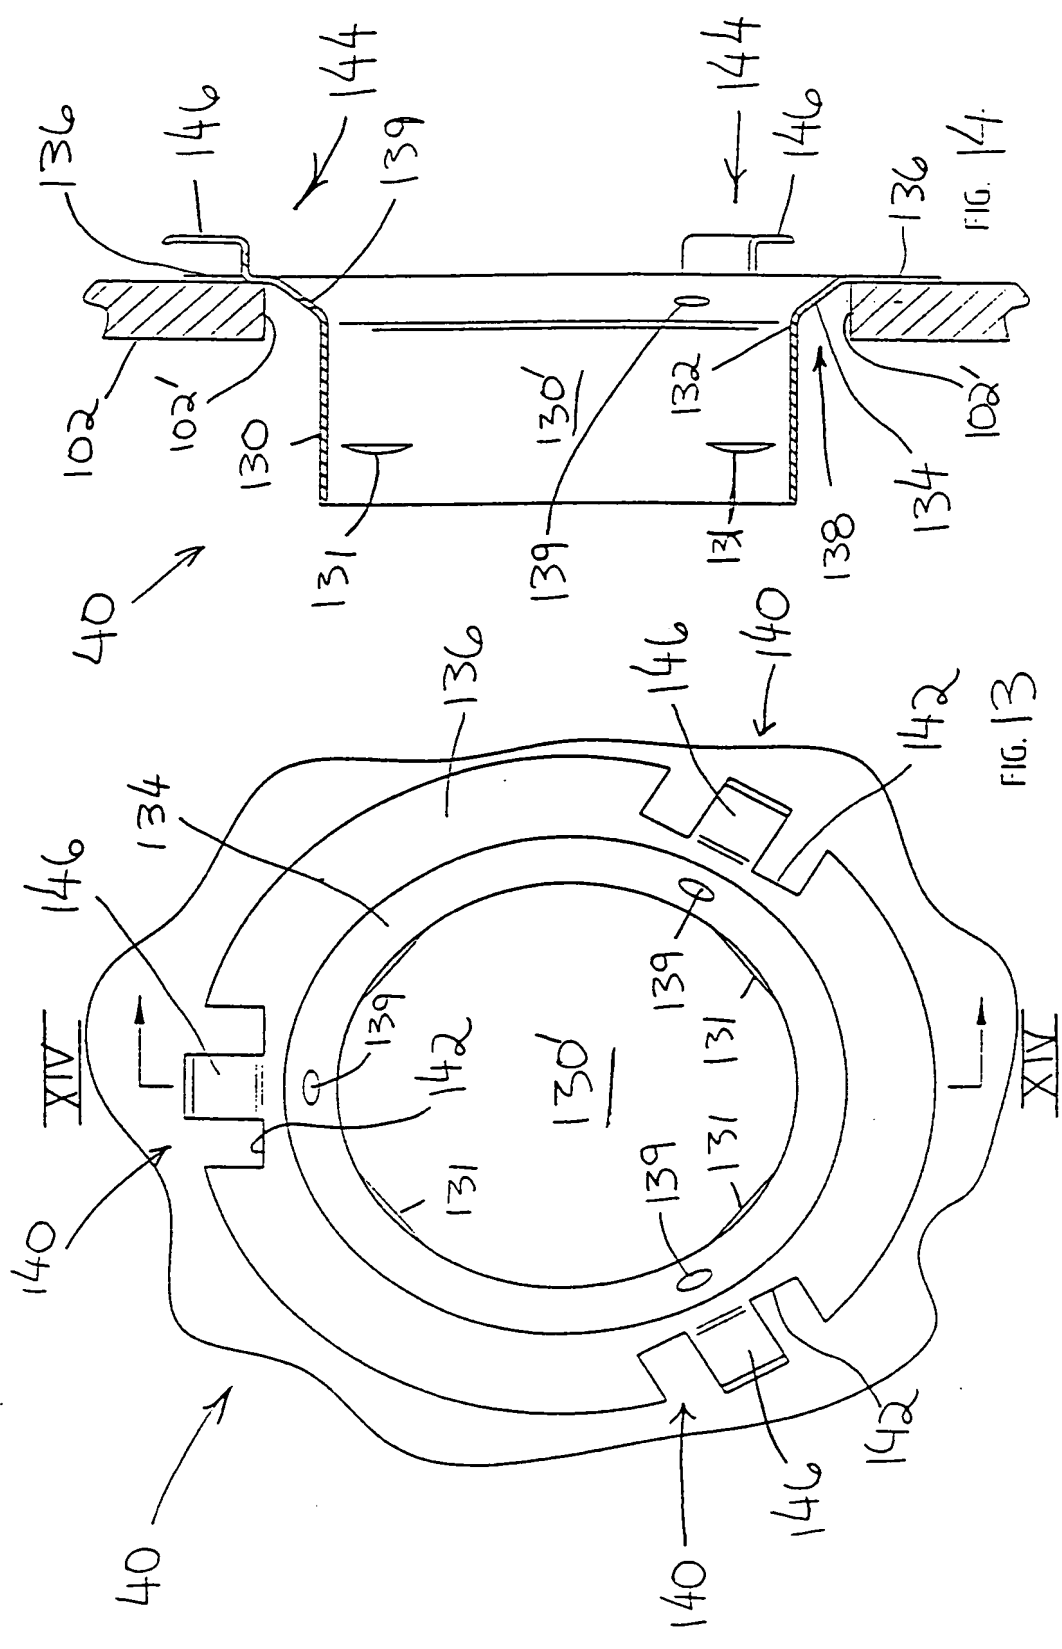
is a cross-sectional view of a mechanical assembly. It shows a central shaft (130) with a central bore (131). The shaft is surrounded by a housing (136) which has a central bore (132) and a flange (134). The housing is secured by a nut (140) and a washer (142). The assembly is shown in a cross-section with a dashed line indicating the hidden part of the shaft. The label 40 points to the housing assembly.
